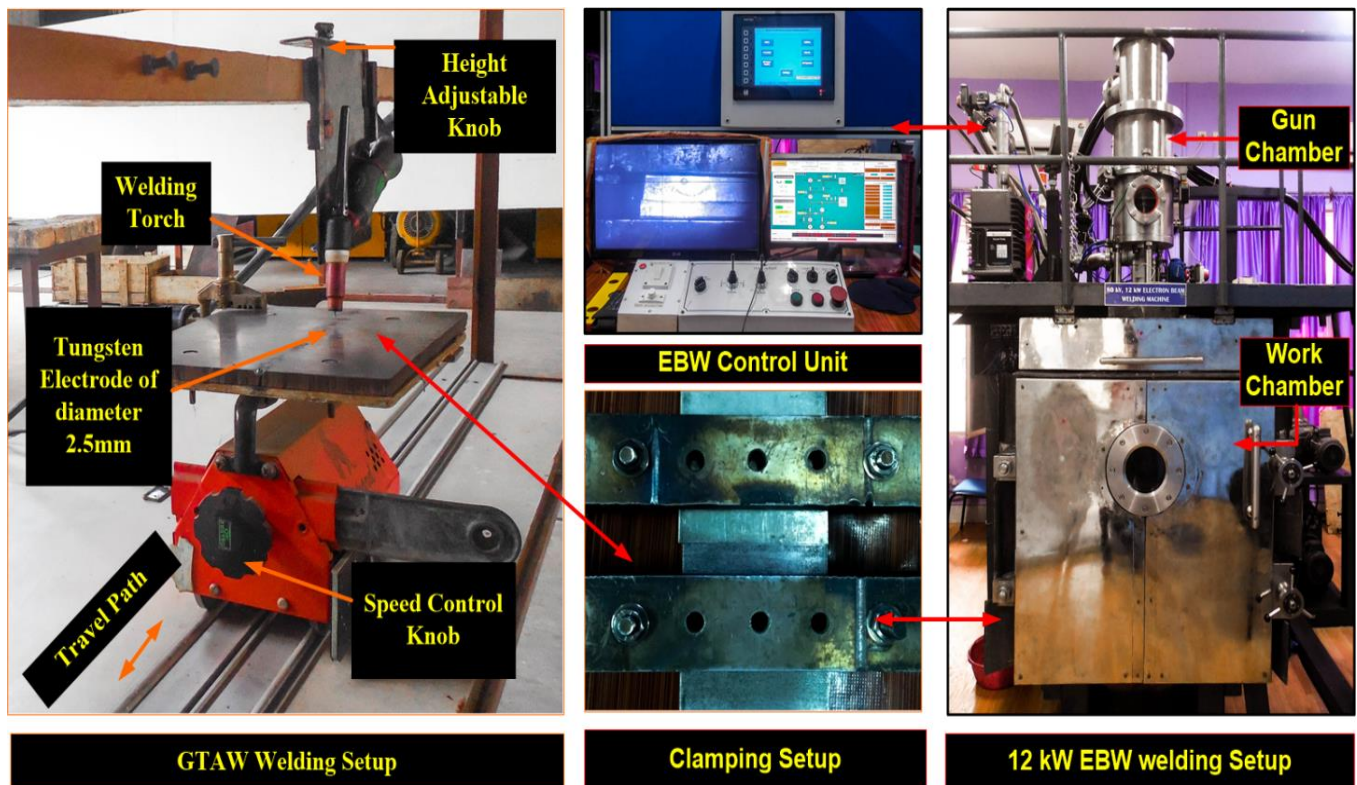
GTAW and EBW welding setupTable 1: Welding parameters for GTAW samples
